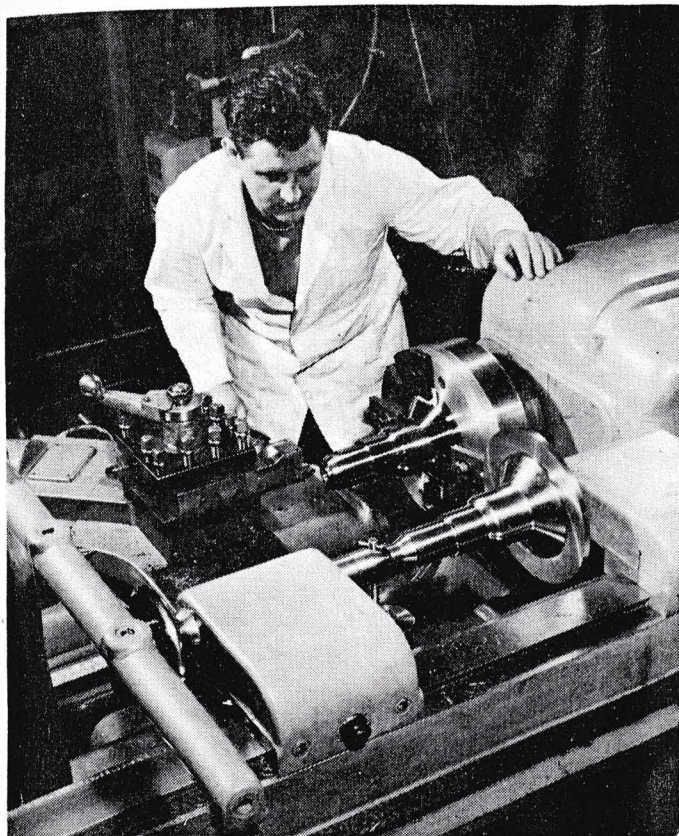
Tracer lathe copying shaft coupling element from a master. Requirements of accuracy and finish are most exacting.
